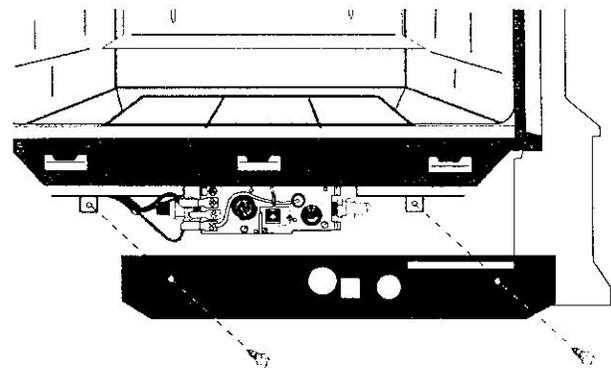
Replace the valve cover plate with two 1/2" sheet-metal screws.
